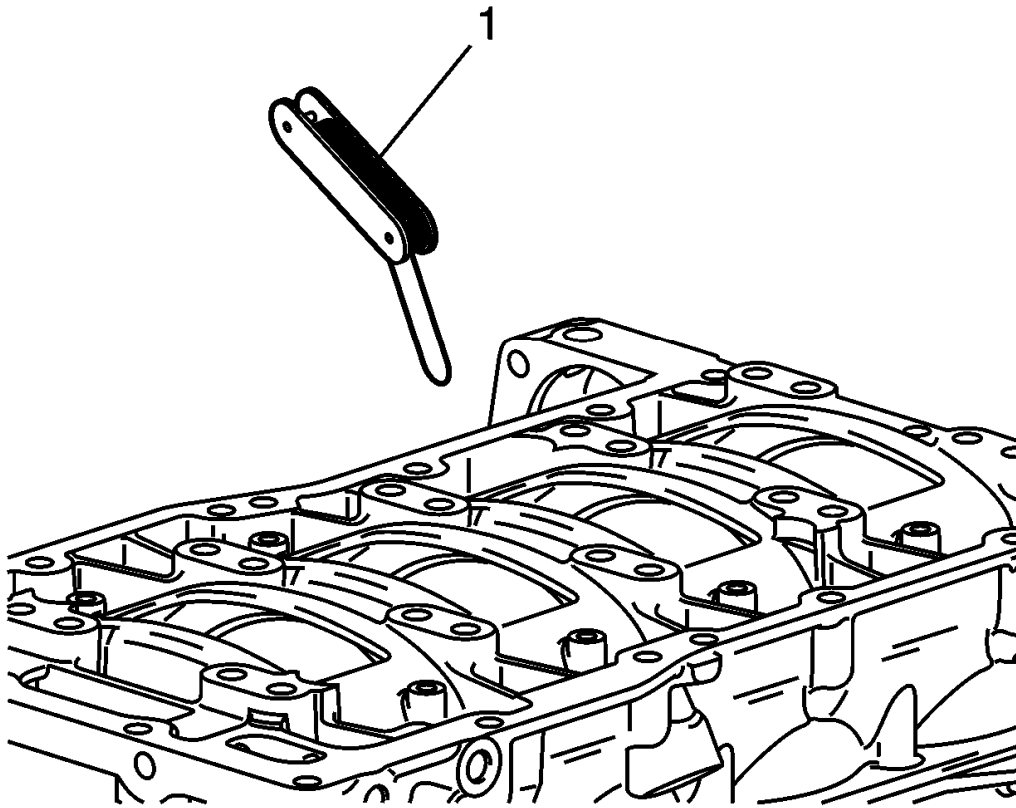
View of Checking Rod Side Clearance With Feeler Gage
